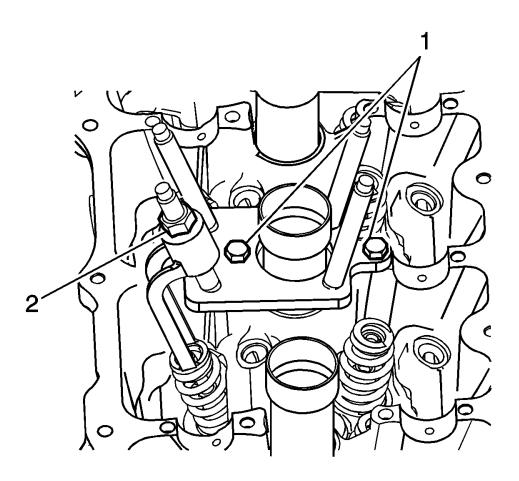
View Of Installed Valve Spring Compressor Tool Courtesy of GENERAL MOTORS COMPANY
